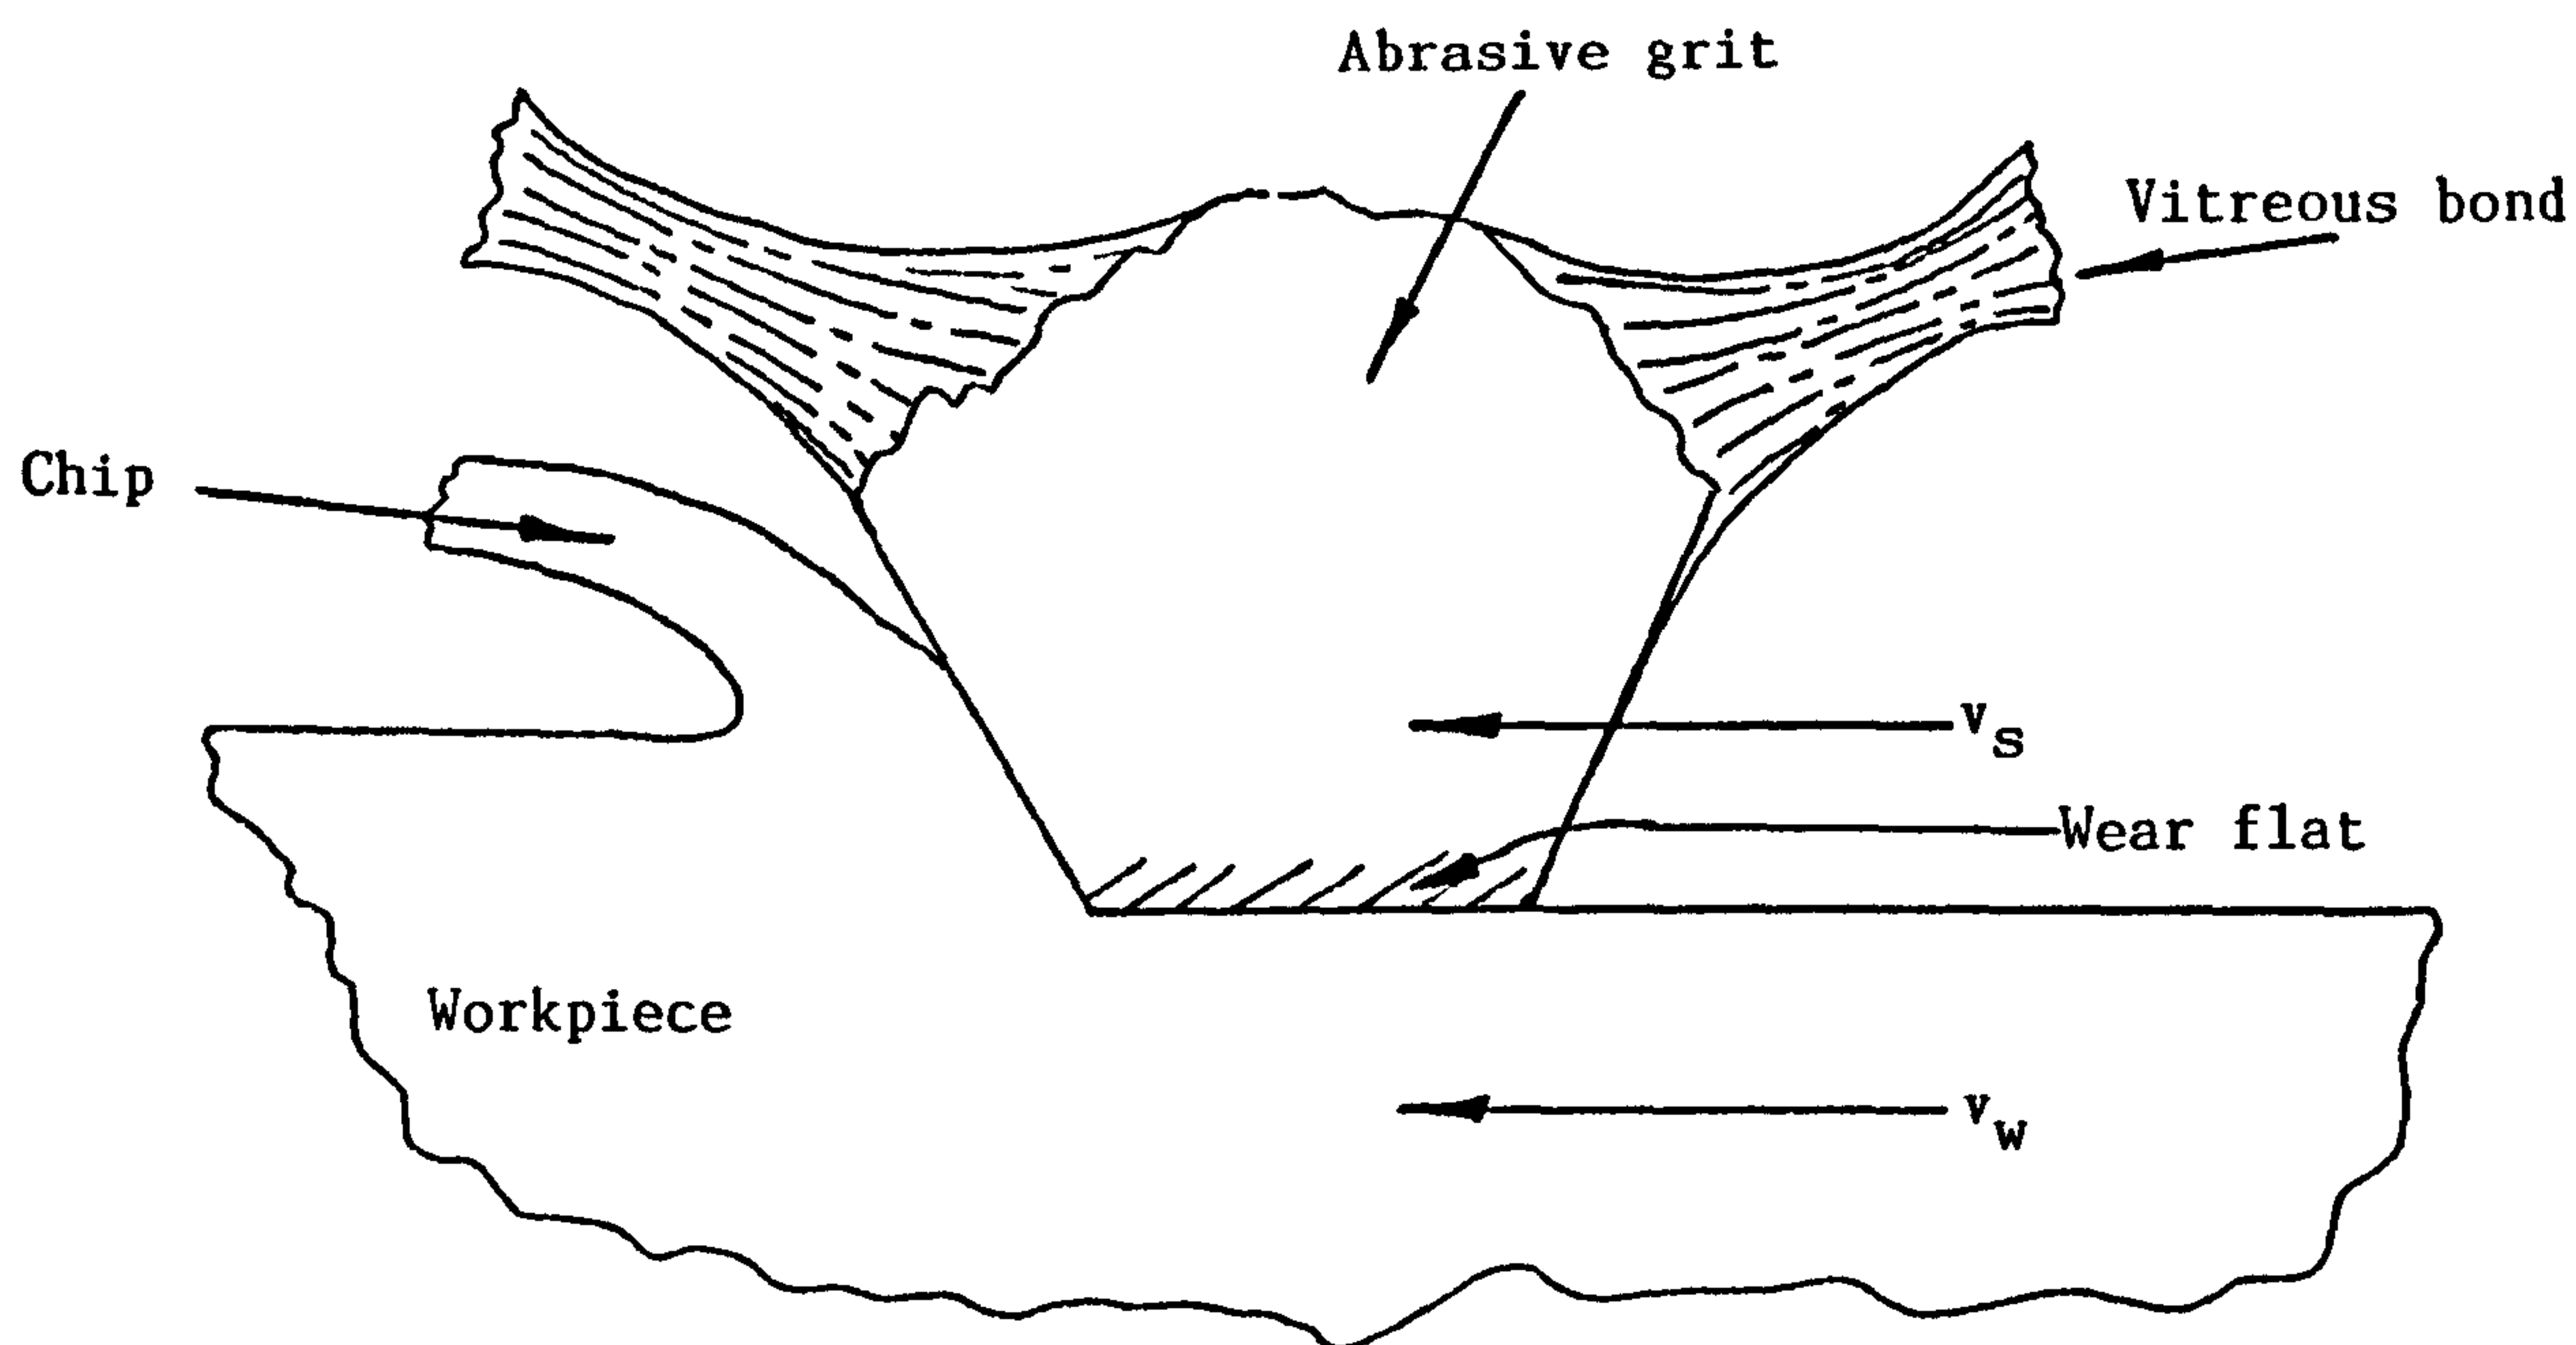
Abrasive grit cutting a chip with the dulled wear flat sliding against the newly-machined surface.
